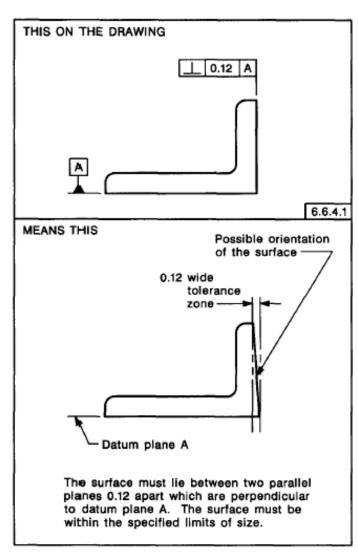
SPECIFYING PERPENDICULARITY FOR A PLANE SURFACE
